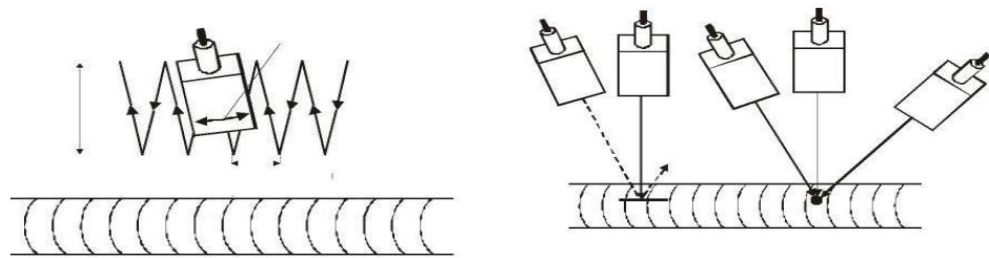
Meandering scan of the weld and swiveling of the probe [2]
